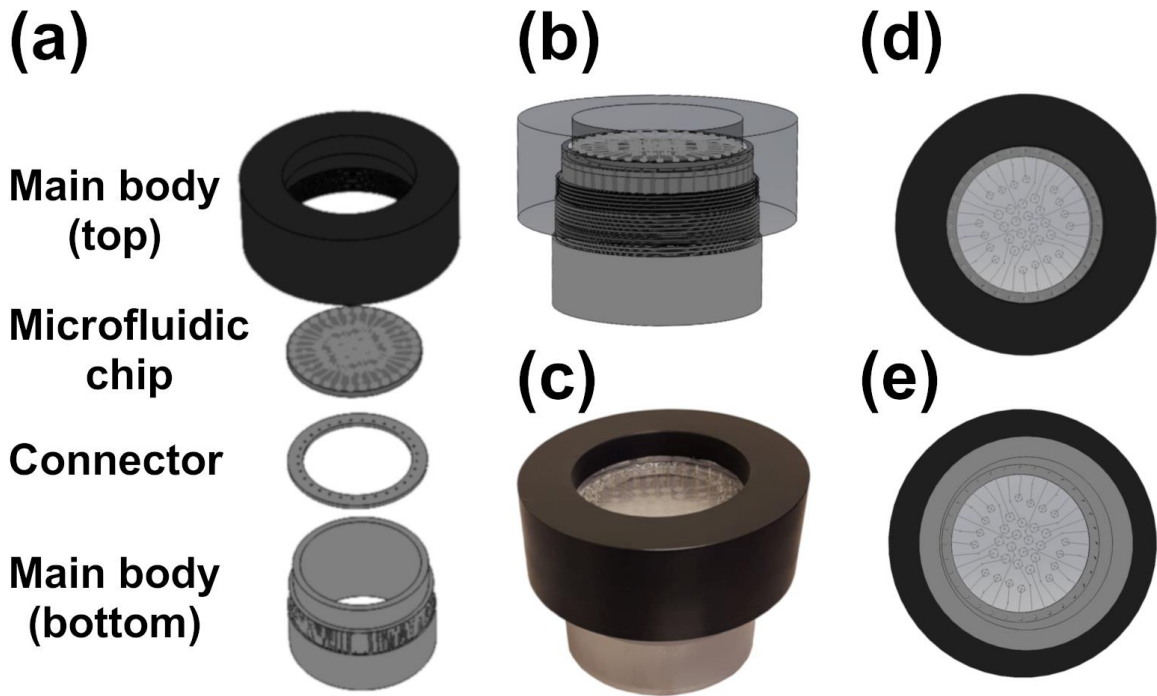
Microfluidic manifold to house rapid-prototyped microfluidic devices. (a) Manifold modular components in an exploded view. (b) Solid model of assembled modular system (side view). (c) Photograph of assembled modular system (side view). (d) Solid model of assembled modular system (top view). (e) Solid model of assembled modular system (bottom view).
